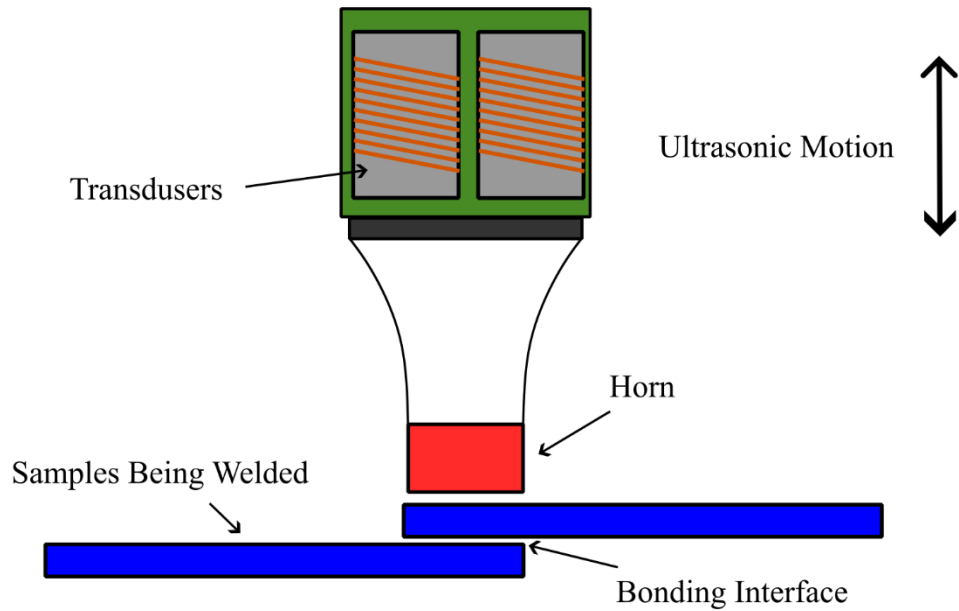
Diagram showing the ultrasonic welding process being used to weld two samples together for lap shear testing
